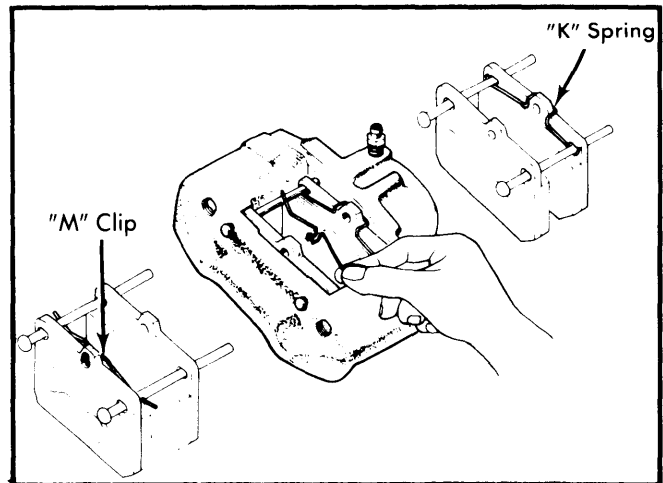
Installation Direction of Spring and Clip on Brake Pads. Also, Installation Position of Retaining Pins. Caliper Shown is Used on Arrow & Colt Except Colt St. Wgn.
